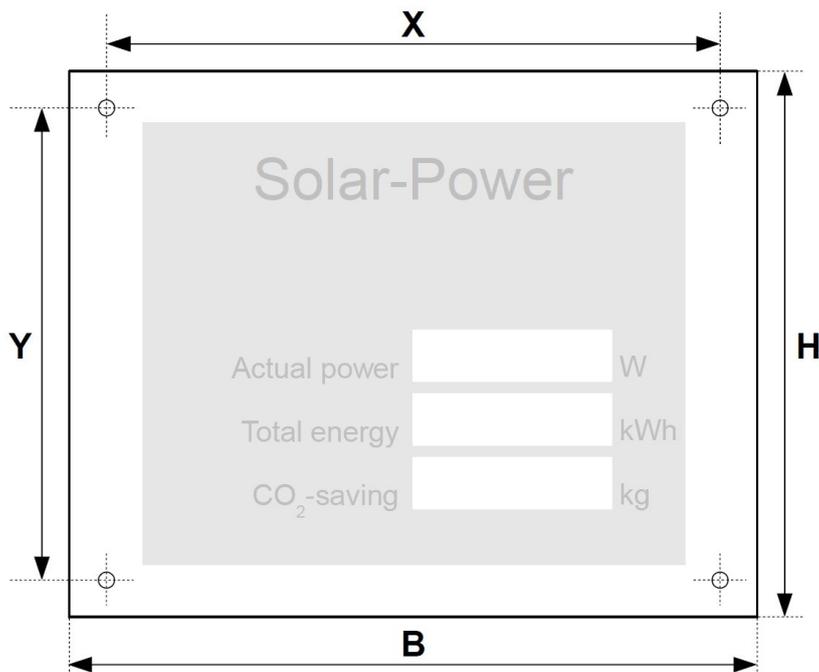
Outside dimensions and drilling dimensions glass displays
